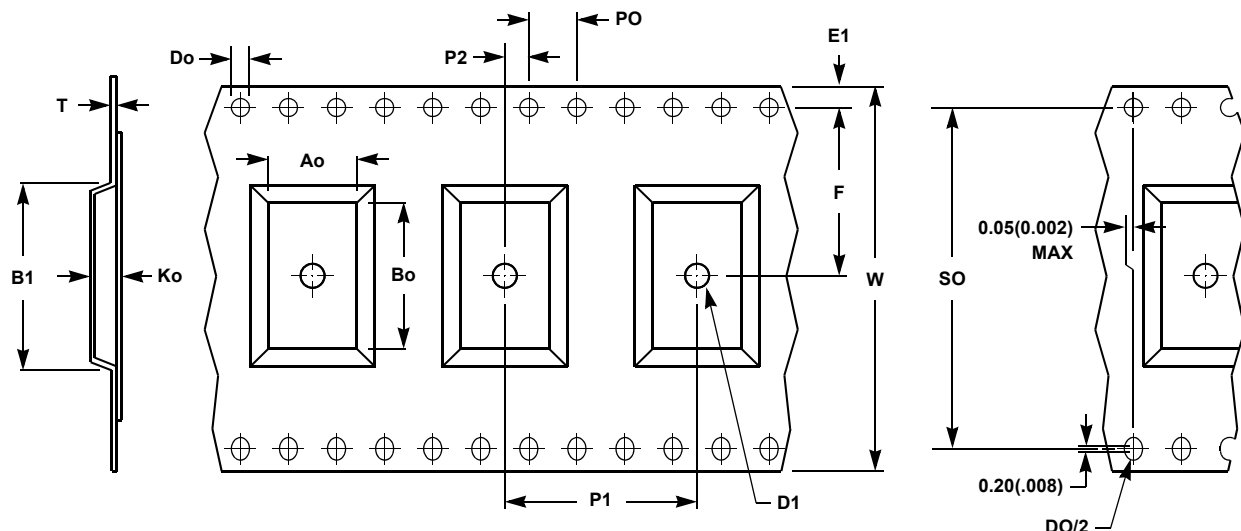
CONFIGURATION DRAWING FOR 32MM AND 44MM POCKET TAPE
